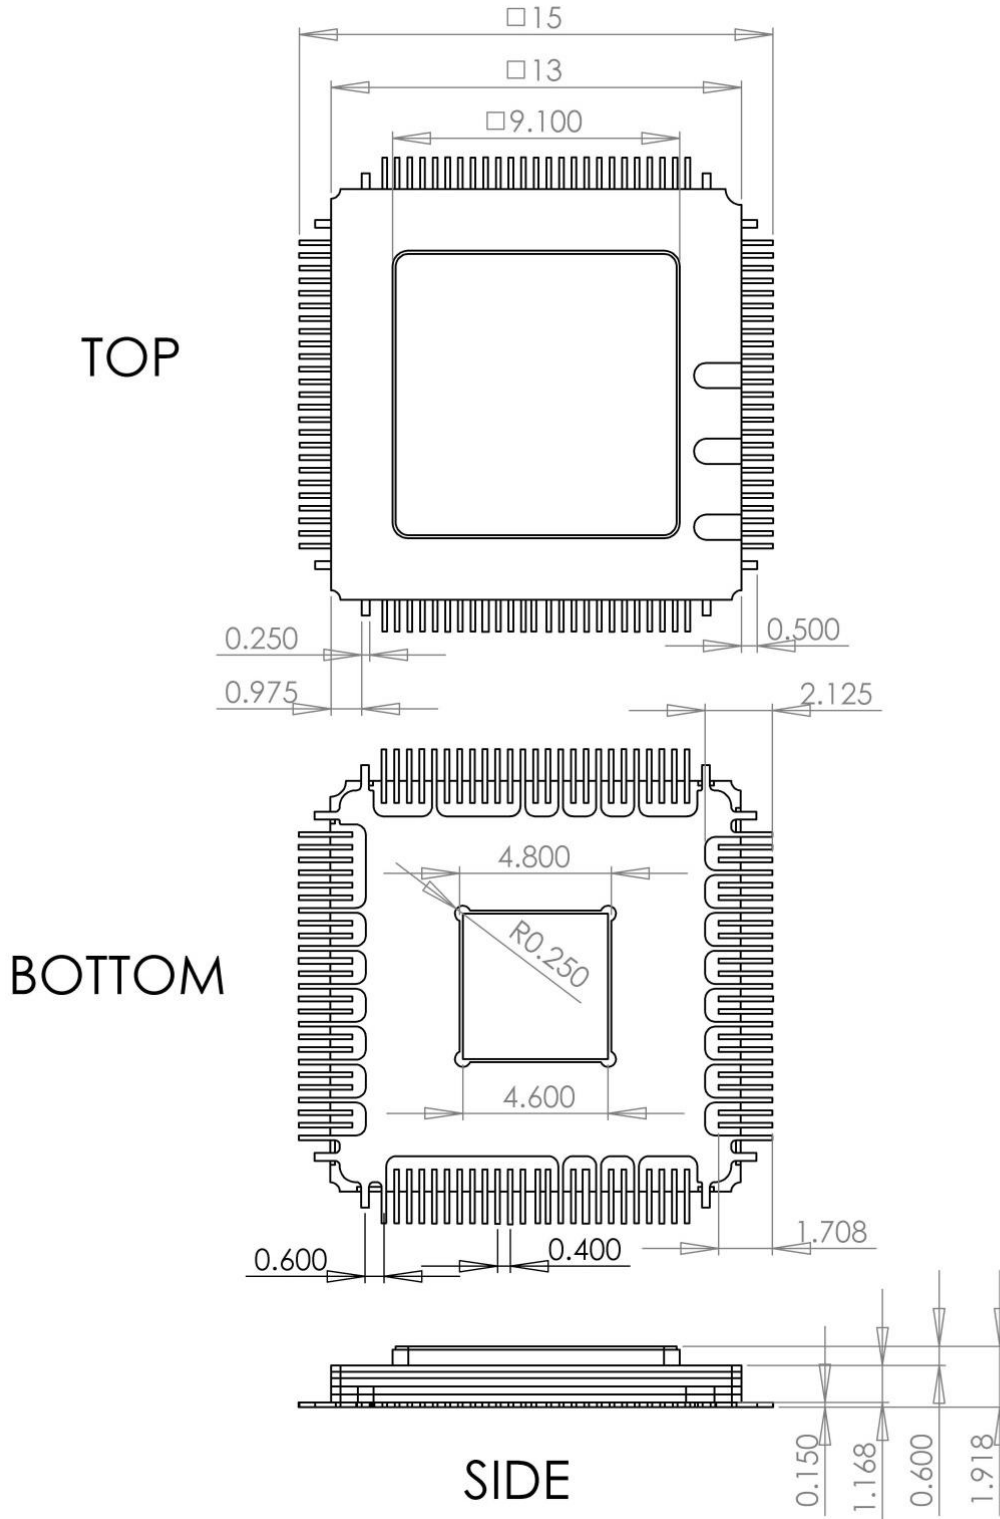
CQFP 100-Pin Package Drawing (All Dimensions in mm)
